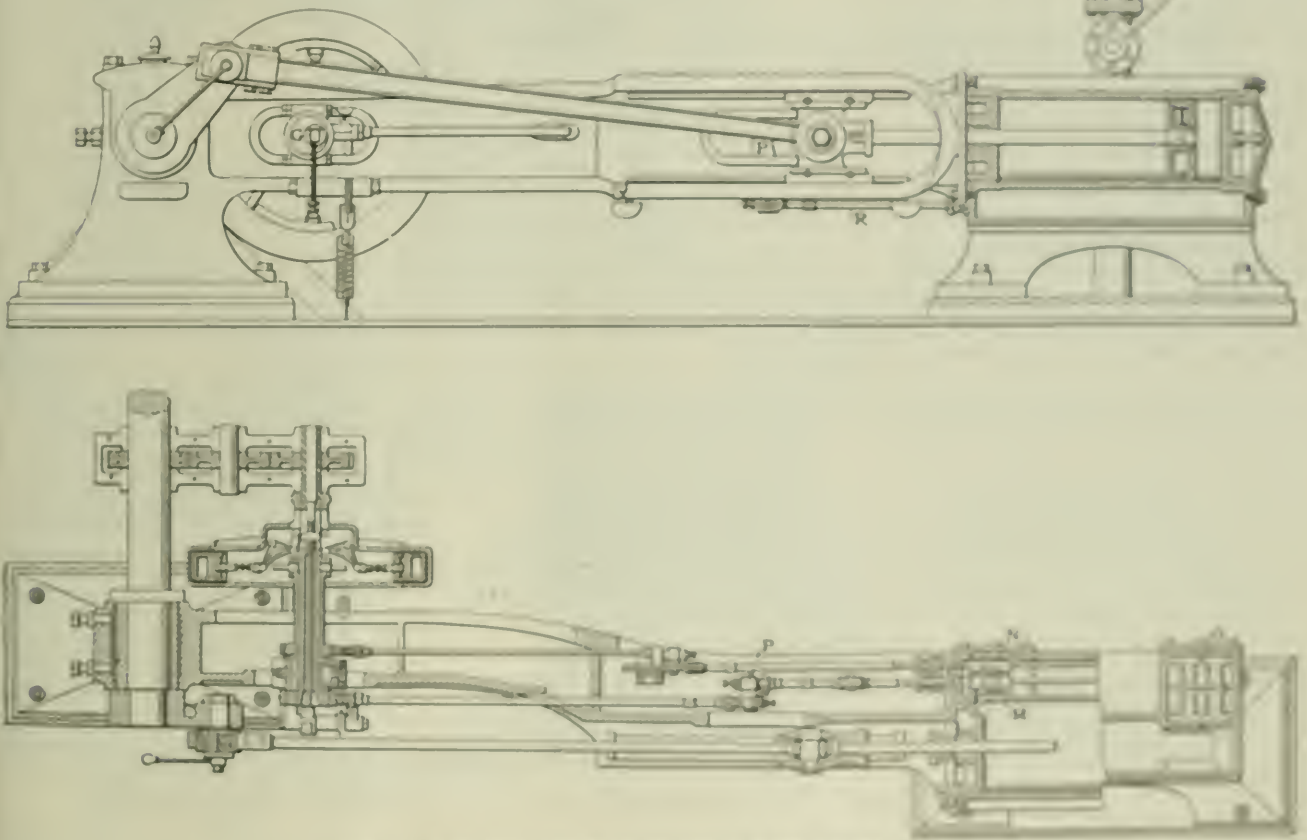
ELEVATION AND PLAN OF THE CUMMER ENGINE
